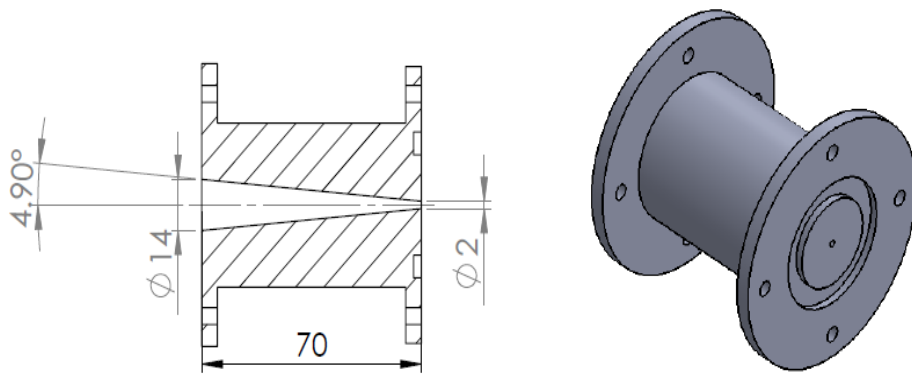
(Shows a 2D Drawing of The 70mm Diffuser)
